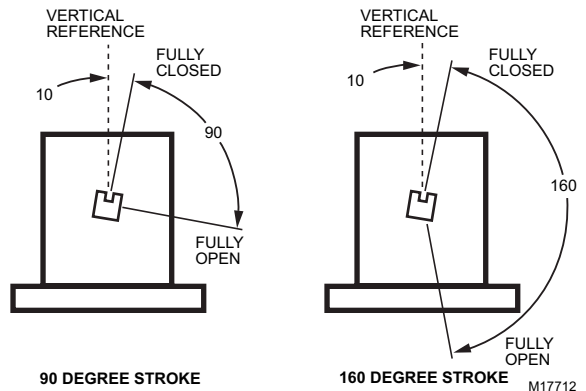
Motor shaft positions at stroke limits (viewed from power end of motor).
